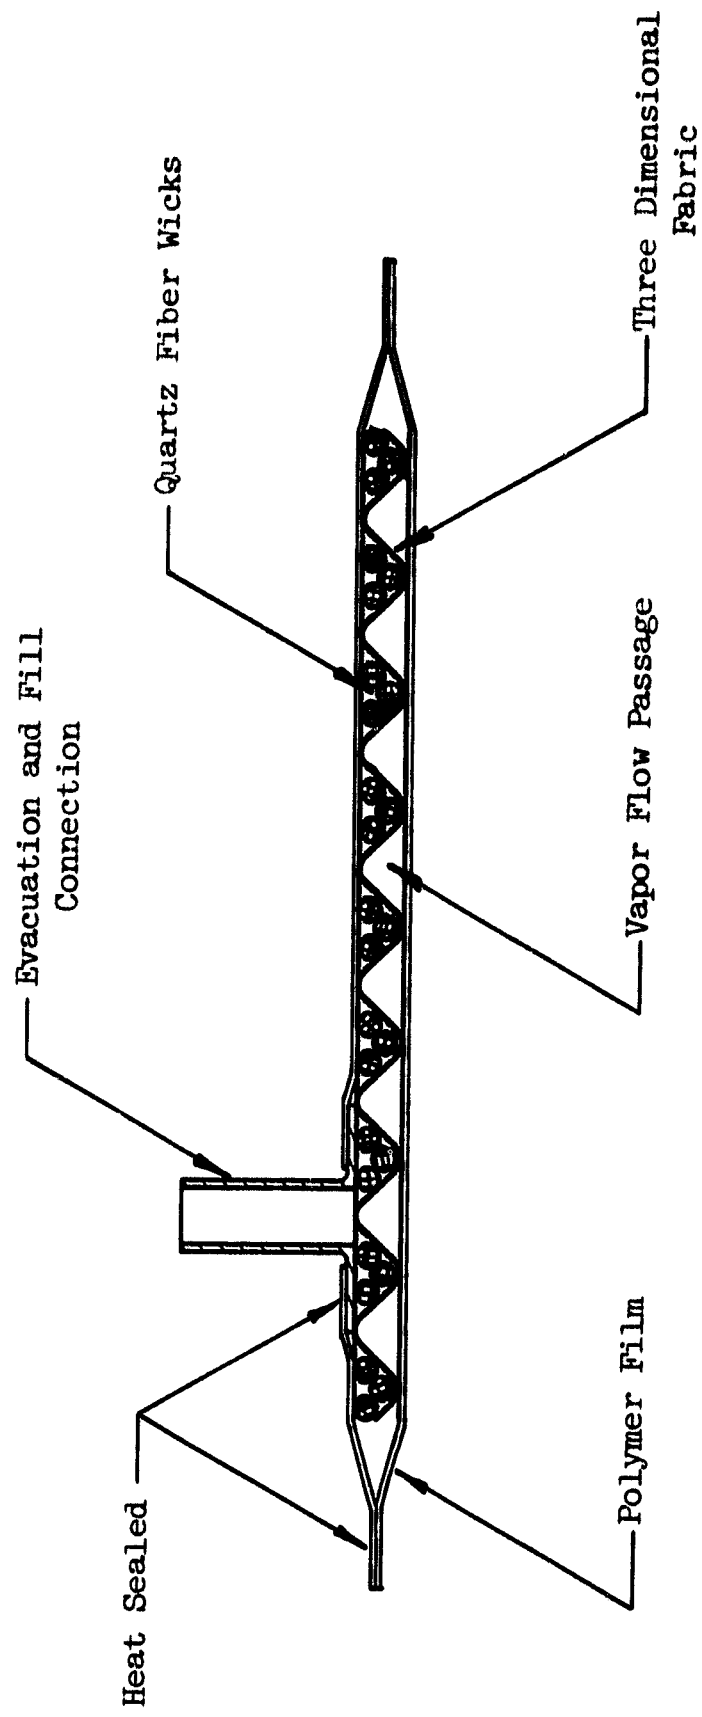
FLEXIBLE HEAT PIPE PANEL, SCHEMATIC CROSSECTION
